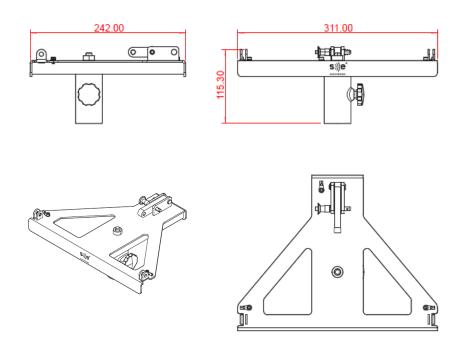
L 35 UB views and dimensions. Annotations given in millimeters.
